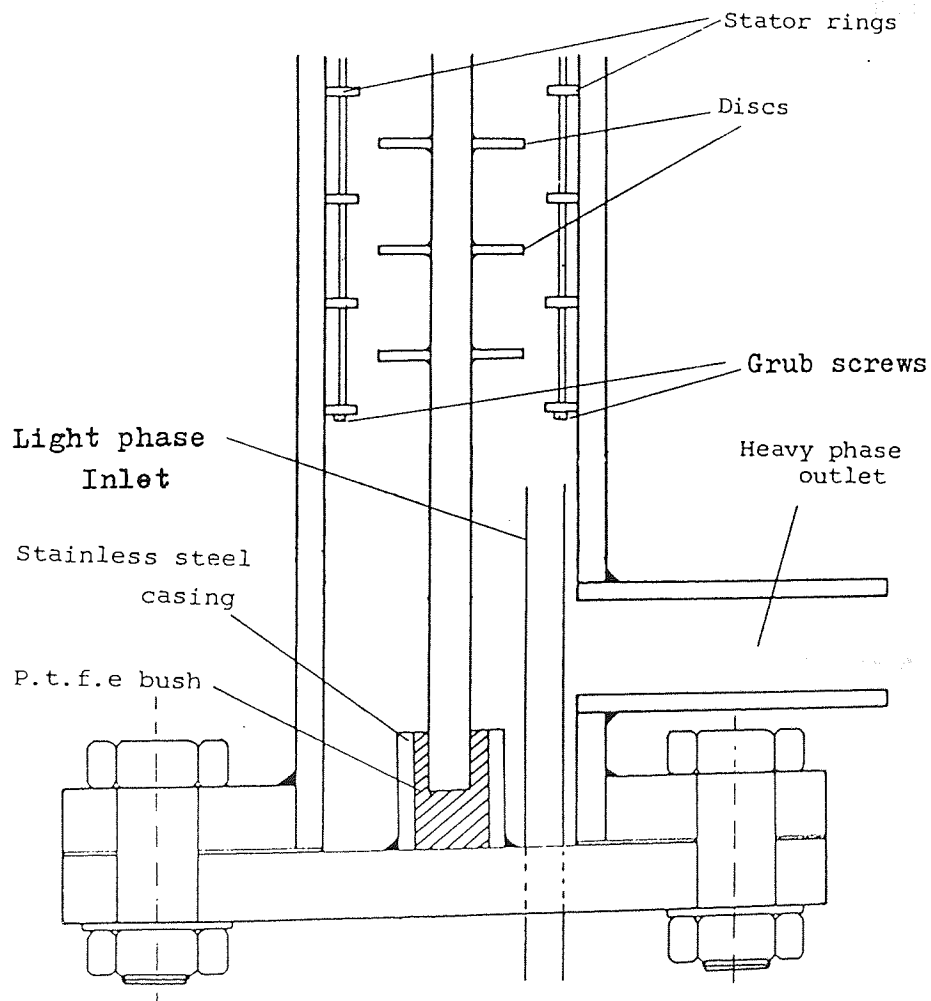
CONSTRUCTIONAL DETAILS OF BOTTOM OF COLUMN.
